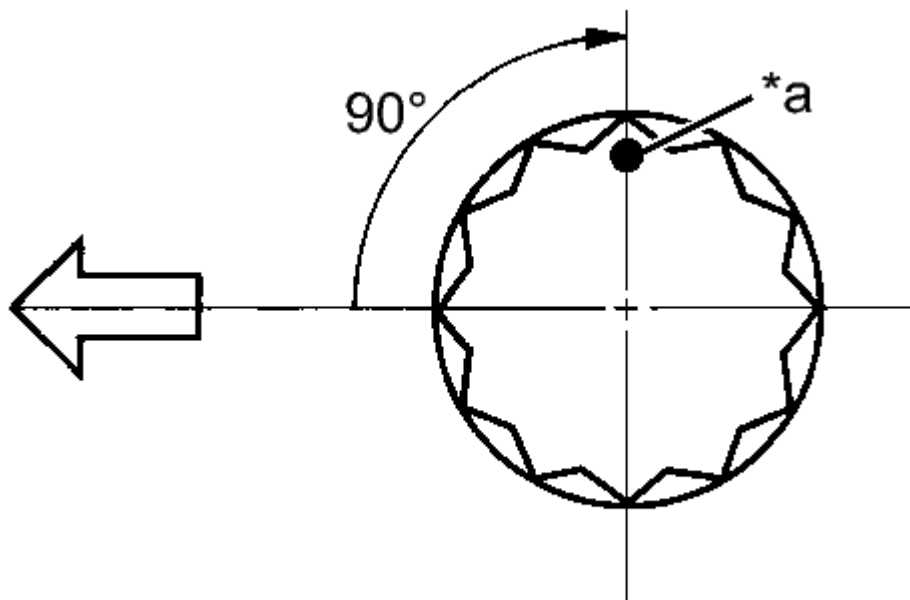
Identifying Tightening Bearing Cap Bolts An Additional 90 Degrees
